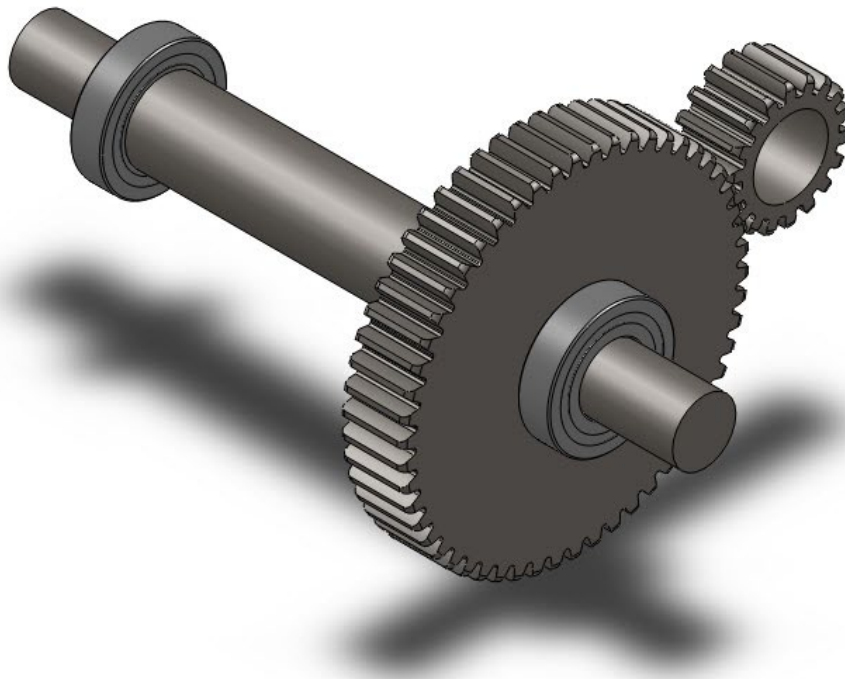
CAD schematic of output assembly. The floating gear is splined to the Kawasaki output shaft.
